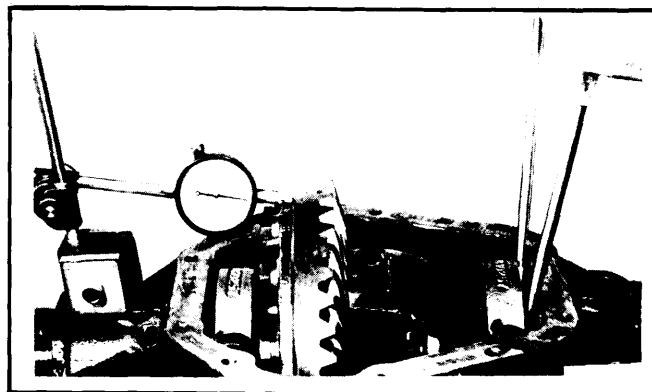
Using Dial Indicator to Measure Differential Endplay
